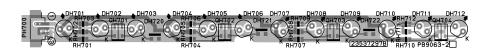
U0032 LED PC Board (Top Side)
